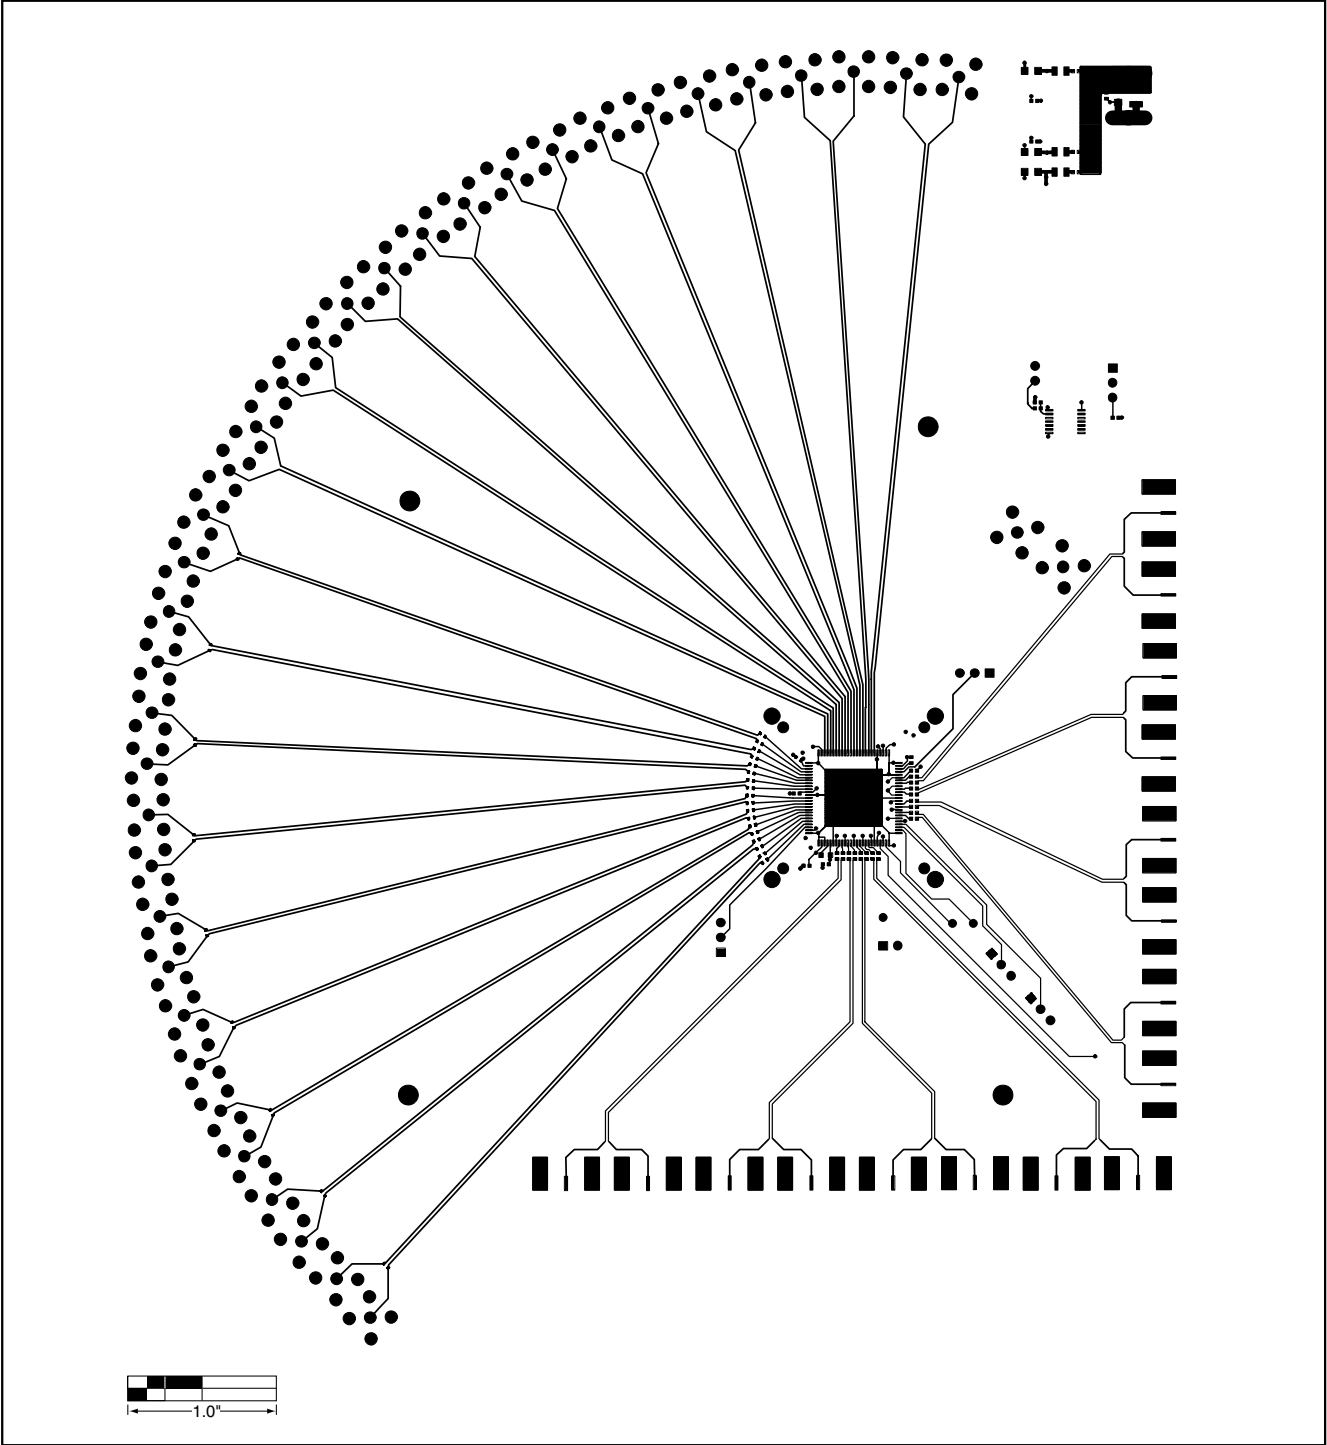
MAX3780 EV Kit PC Board Layout—Component Side
